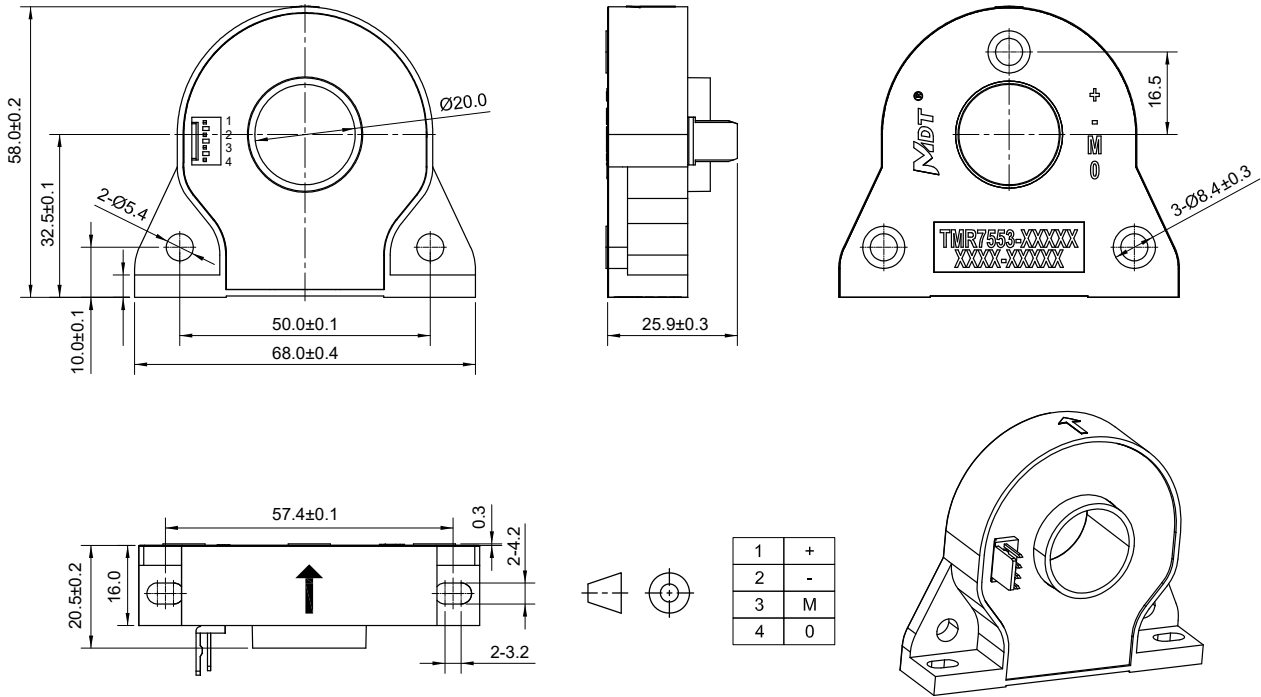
Dimension (unit: mm, tolerances for unmarked scales  $\pm 1$  mm)
